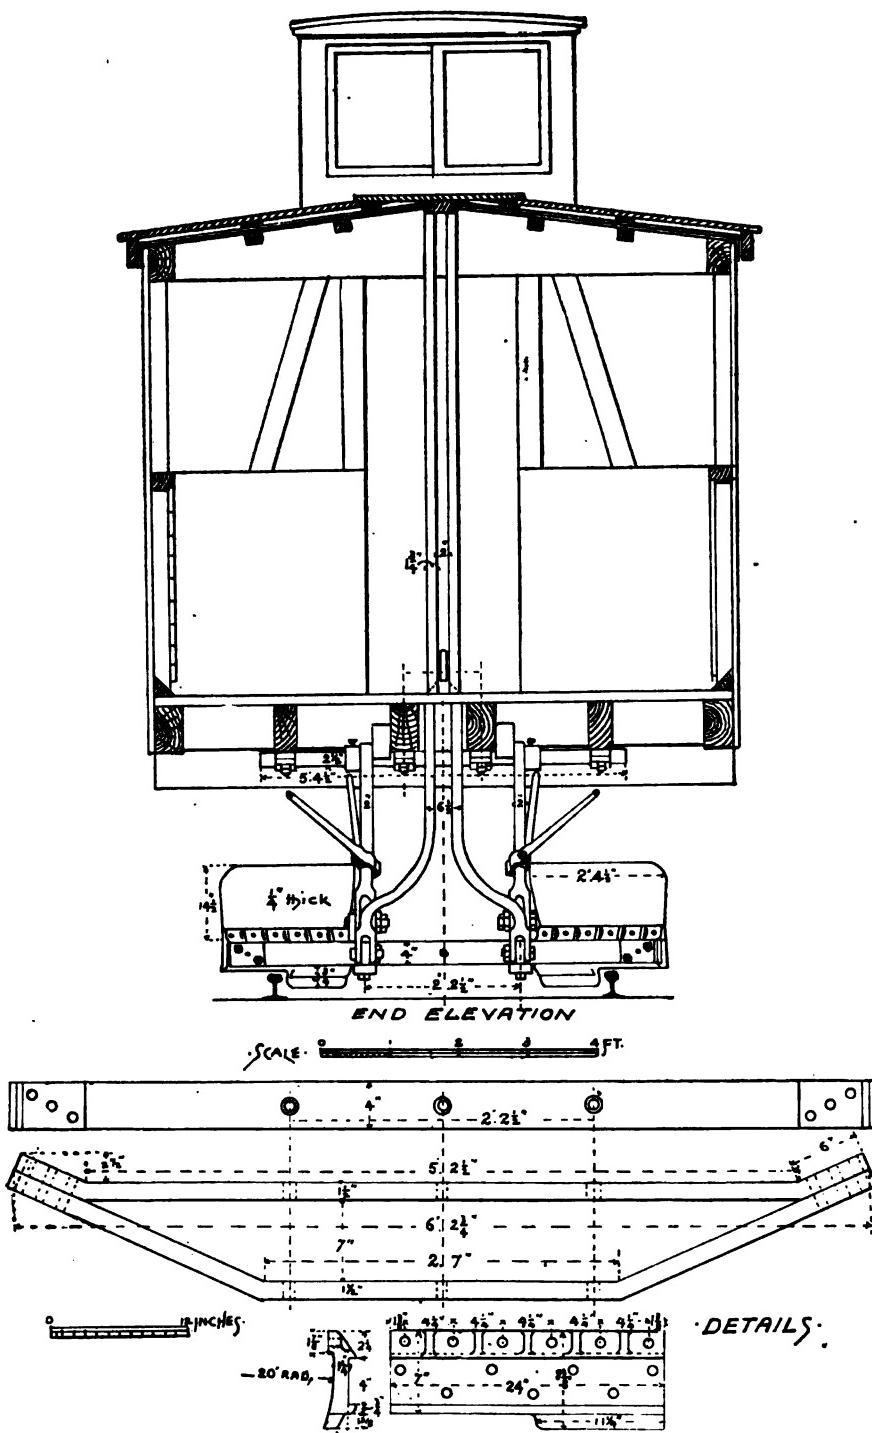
FLANGING CAR: END ELEVATION AND DETAILS.
